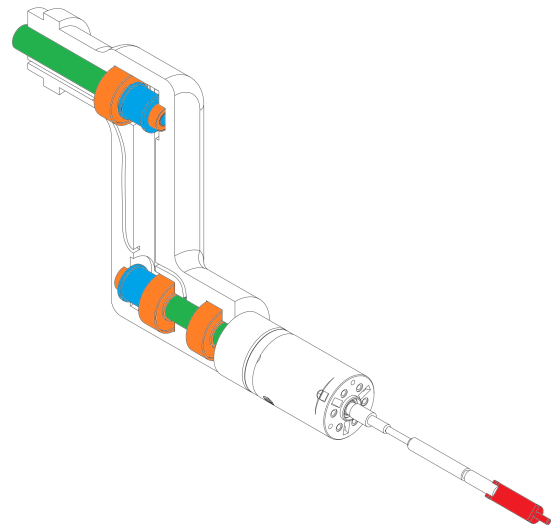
Front-End Internals: Off-Axis Transmission for the Half-Turn Rotating Axis (Green) with Two Timing Belt Pulleys (Blue), Ball-Bearings (Orange), and a Maxon Motor with an Eccentric Rotating Mass (Red)
